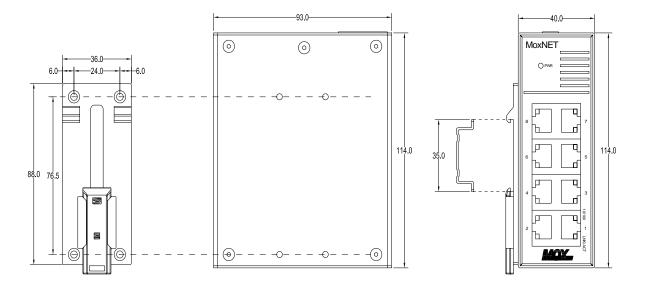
Installation Kit + Side View + Front View of Din Rail Mounted from the Side
